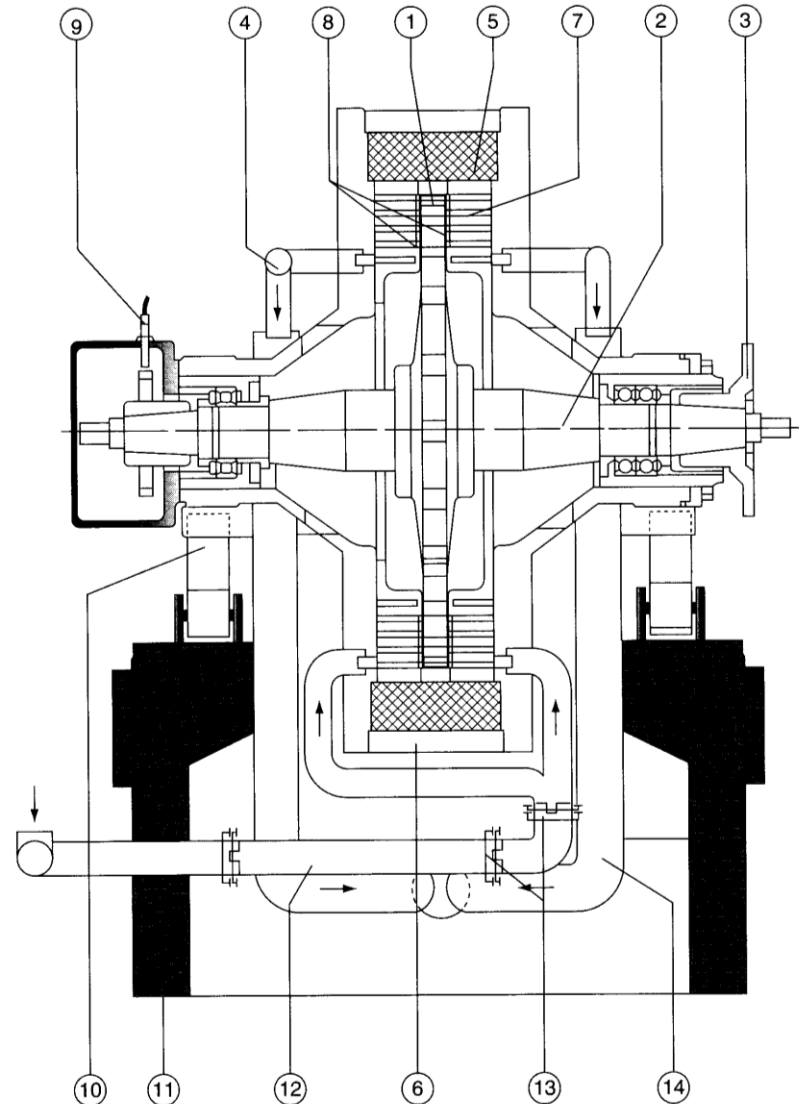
Schenck, dry gap, disc type eddy-current dynamometer 1, rotor; 2, rotor shaft; 3, coupling flange; 4, water outlet with thermostat; 5, excitation coil; 6, dynamometer housing; 7, cooling chamber; 8, air gap; 9, speed pick-up; 10, flexure support; 11, base; 12, water inlet; 13, joint; 14, water outlet pipe
